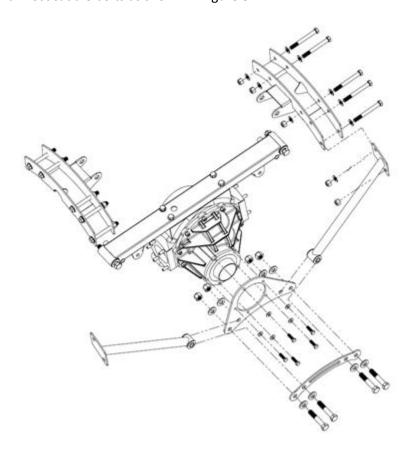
Overhead view of the saddles, center section with third member, and pinion support plate
